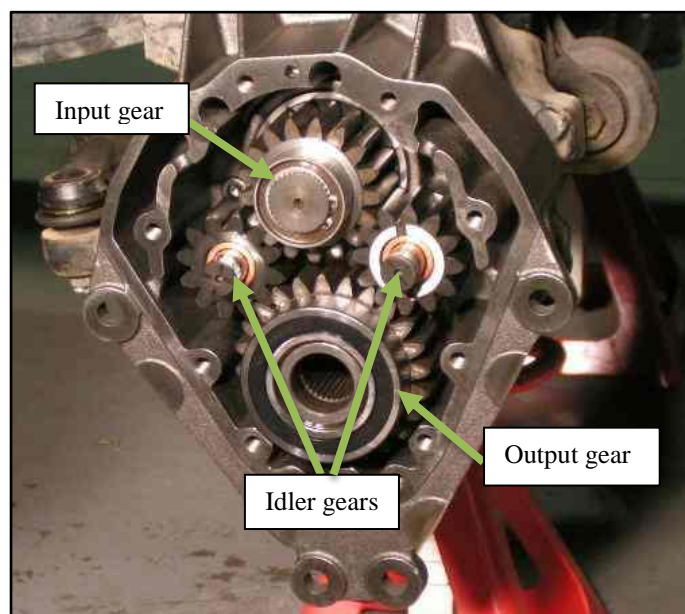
Portal axle gear train with two idler gears (Marks 4WD Adaptors 2002).
